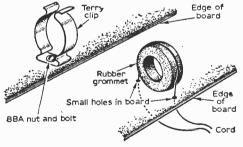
Two methods of mounting the ferrite rod; note that bare wire should not be used to fasten the rod in position.
